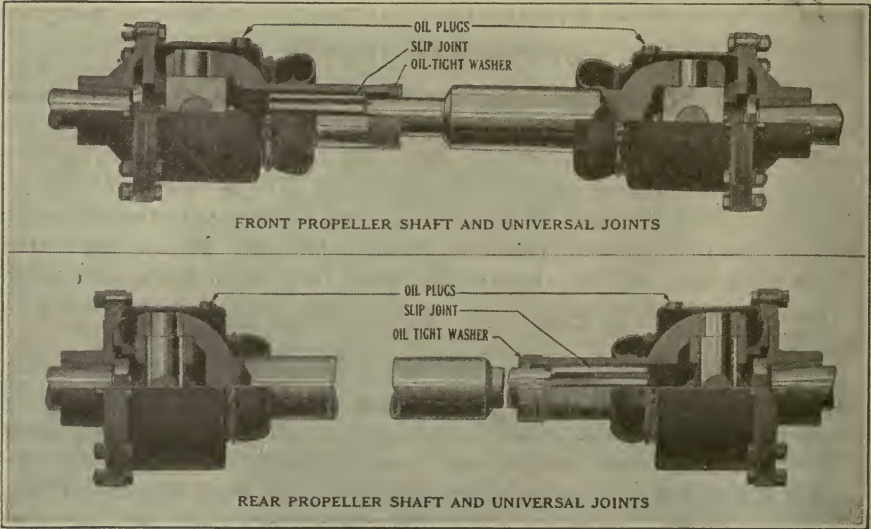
Propeller Shafts and Universal Joints for Truck Use.
